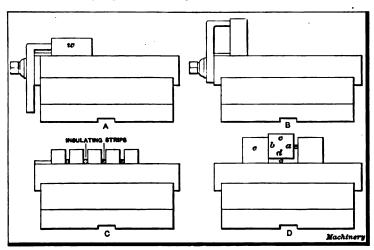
End Views illustrating Different Methods of holding Work on Magnetic Chuck
